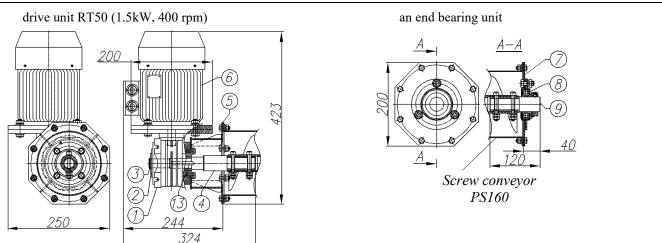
PS160-N1.5/400- a screw conveyor of -160 mm - drive power P=1.5 kW, output rotational speed of 400 rpm
